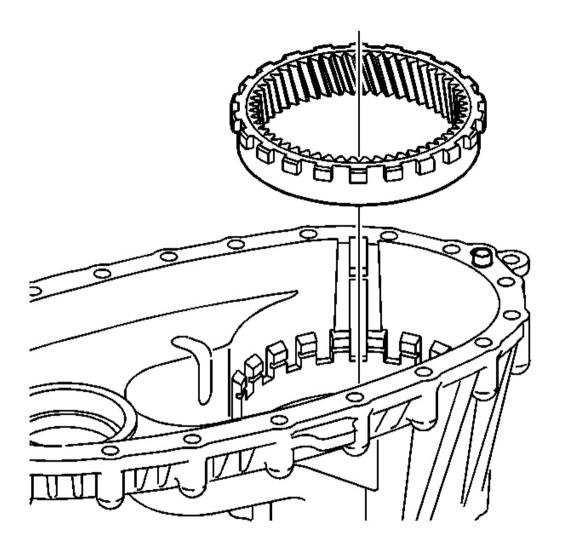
Annulus Gear & Front Case Half Courtesy of GENERAL MOTORS CORP.
